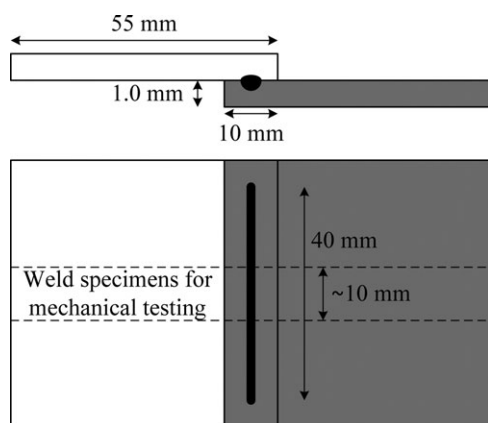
Illustration of the weld specimen and the cut out specimen for mechanical testing.
